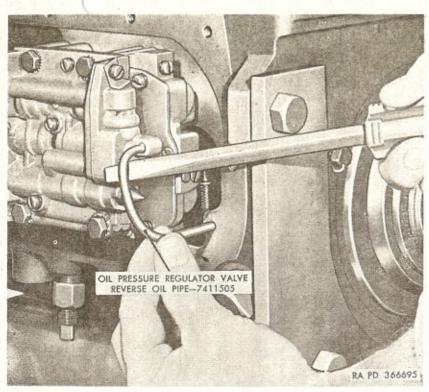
Removing oil pressure regulator valve reverse oil pipe.
